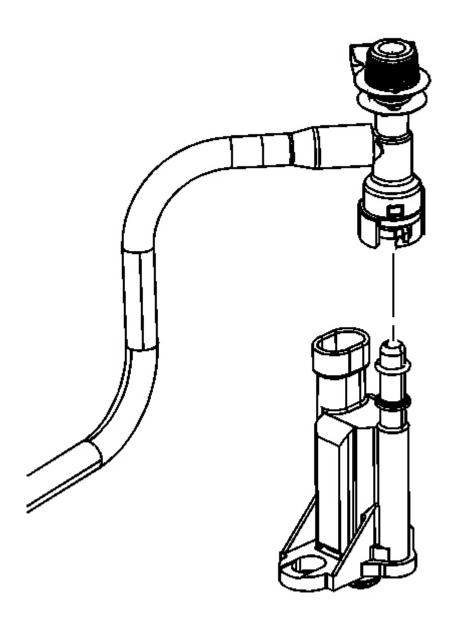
Evaporative Emission Canister Solenoid Valve & Harness Courtesy of GENERAL MOTORS CORP.
